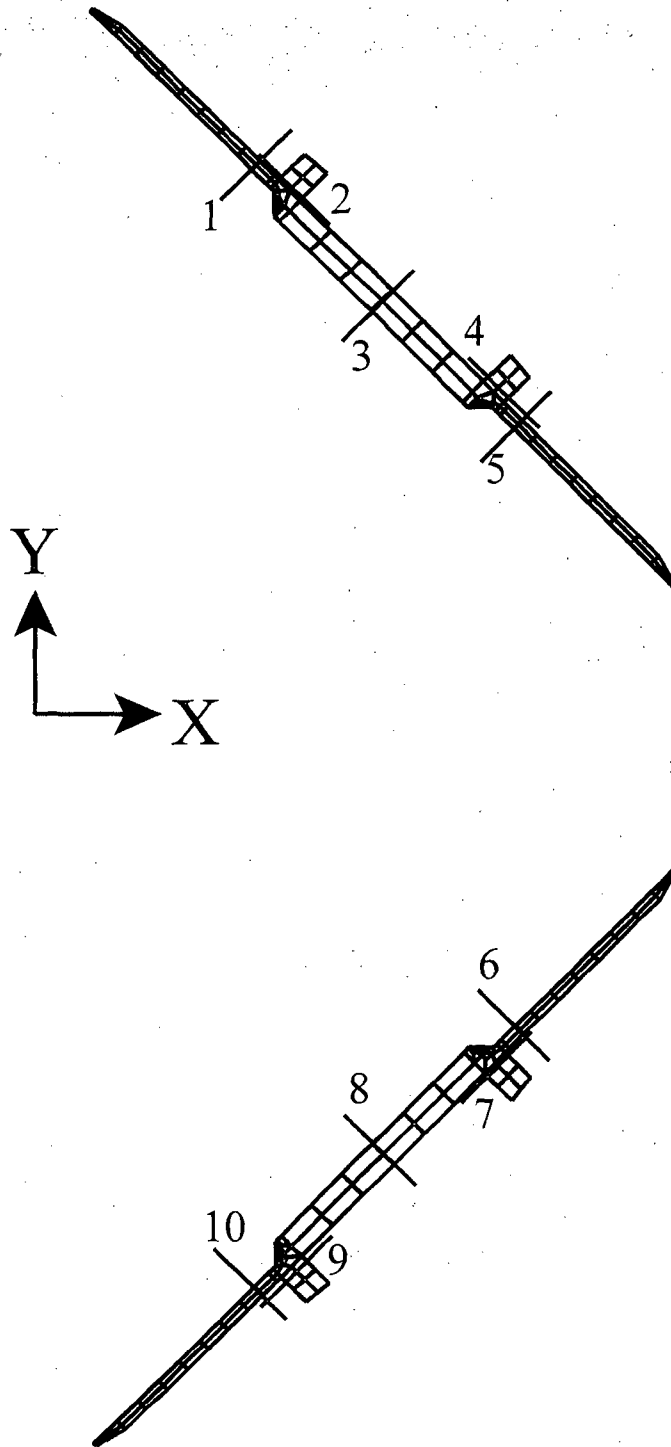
BWR Side Support Weldment Section Cuts – 45° Basket Orientation
